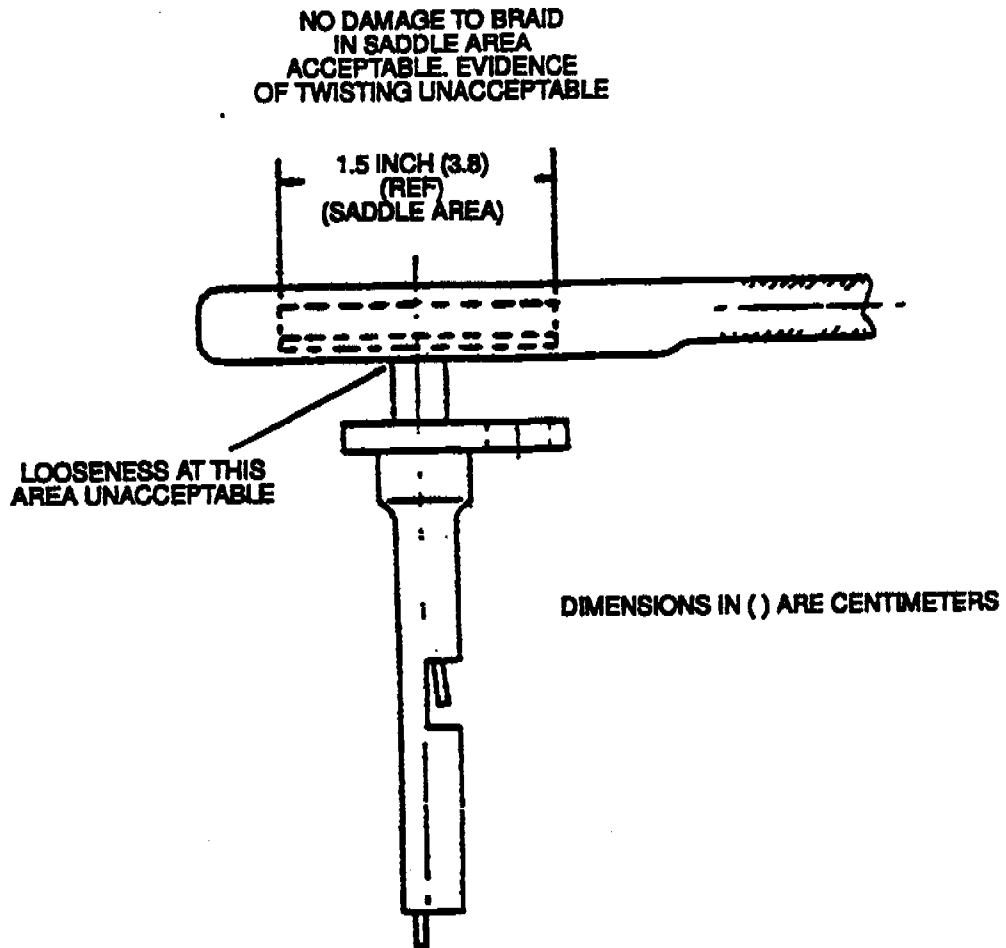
Exhaust Thermocouple Assembly Inspection Area.
